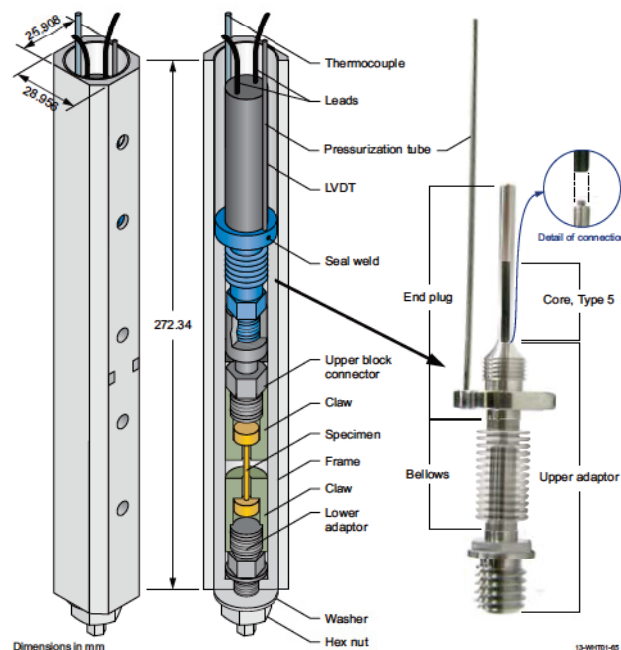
Variable lobe creep test rig (laser welding was used to attach the core to the upper adaptor, the bellows to the upper adaptor and end plug and the pressurization tube to the end plug).
